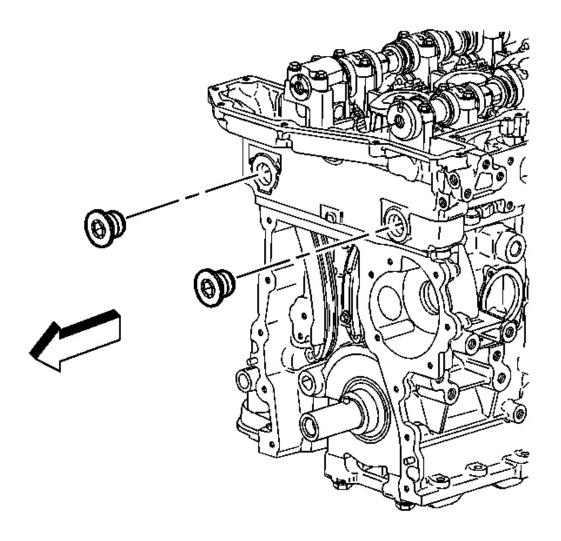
View Of Cylinder Head Access Hole Plugs Courtesy of GENERAL MOTORS CORP.
